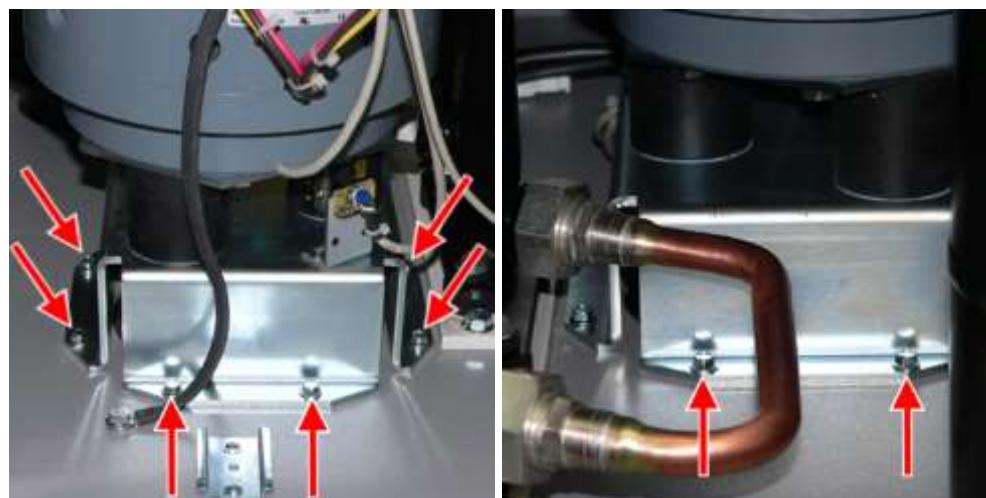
Screws of the motor base, view from the front (left) and from the back (right)
